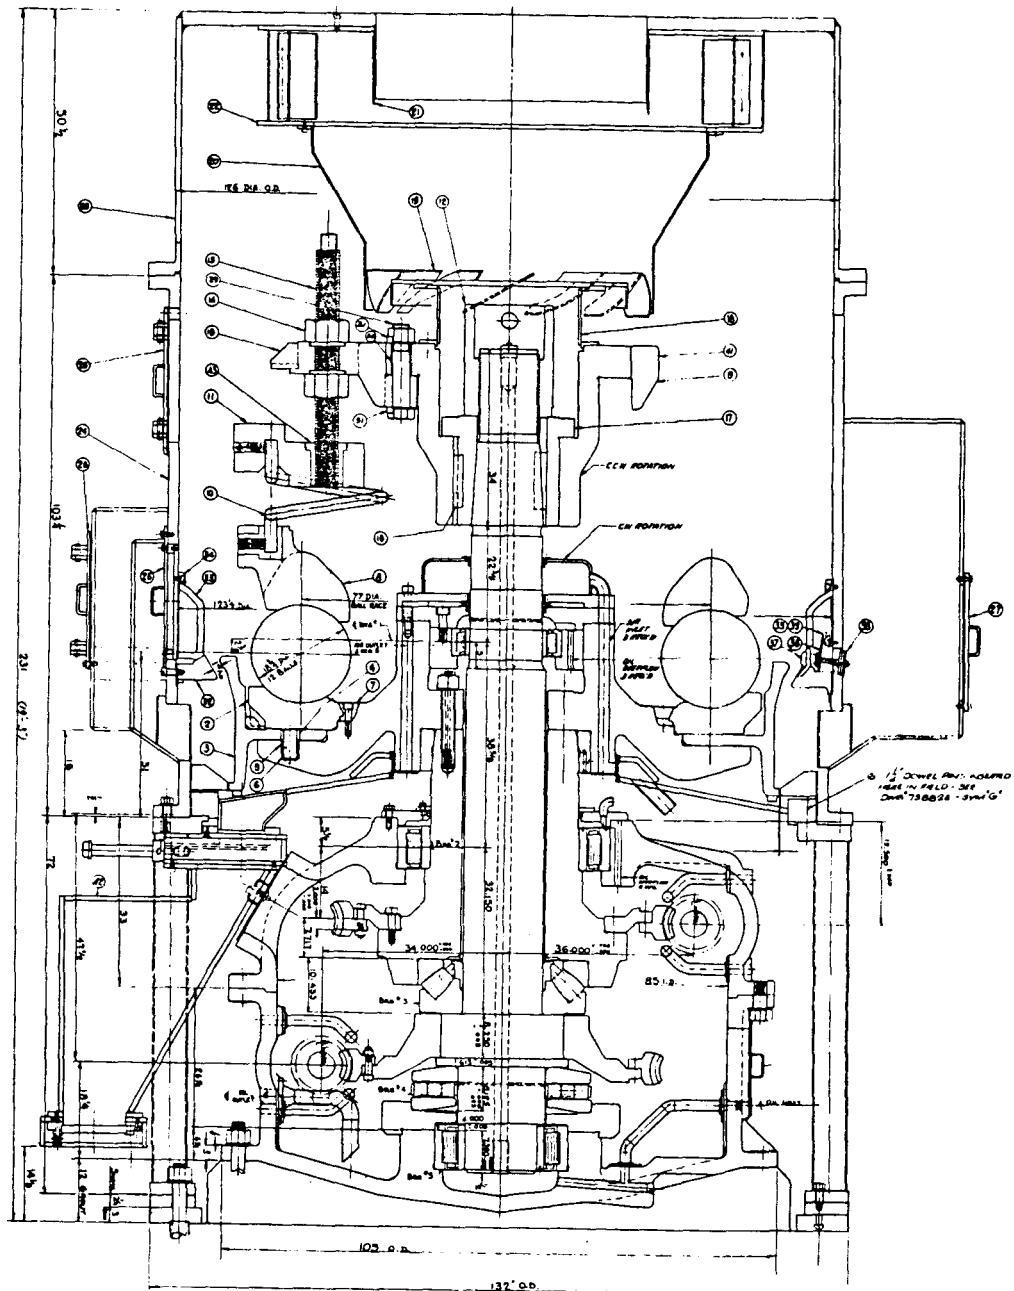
Ball-Race Mill (Part Location Drawing)
